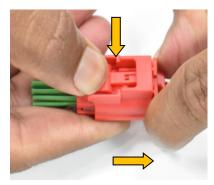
Mating of 6P Receptacle assembly with Dust cap (2327728-2)
